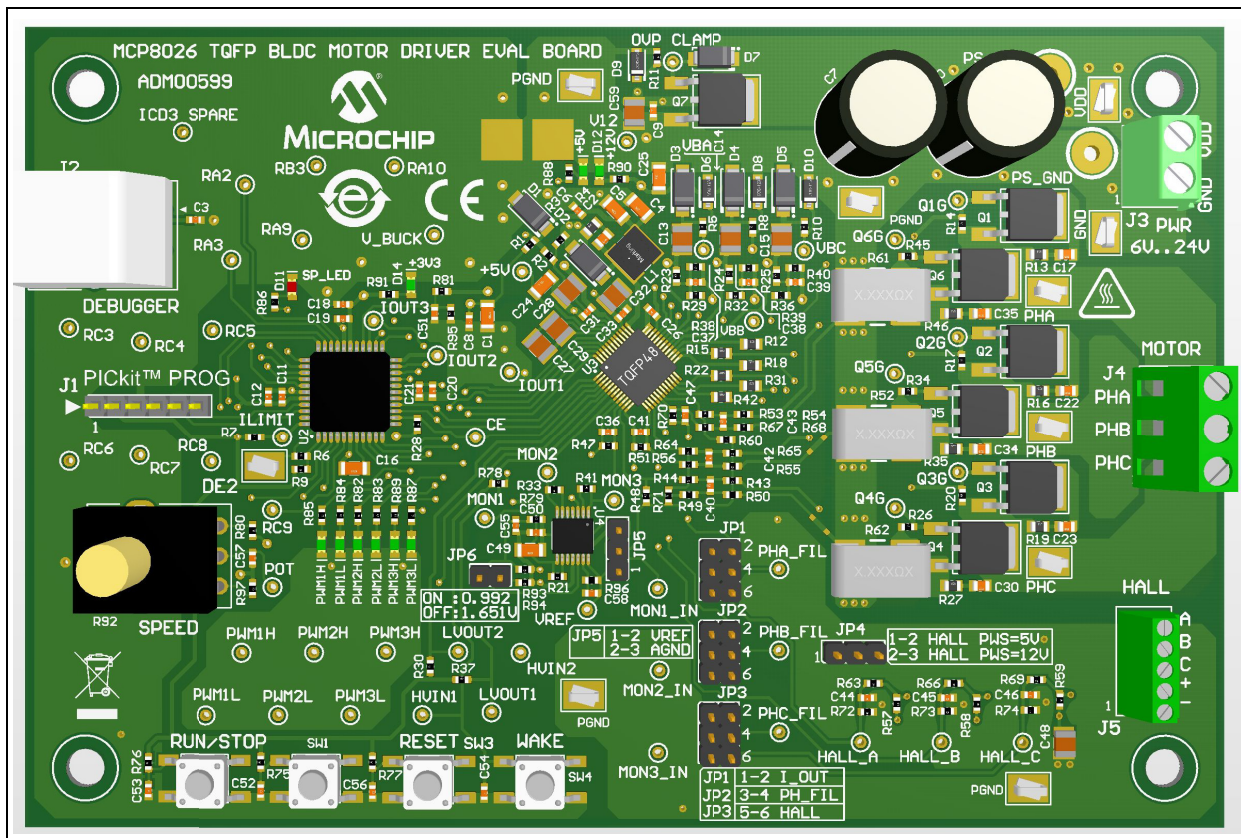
MCP8026 TQFP BLDC Motor Driver Evaluation Board PCB.
